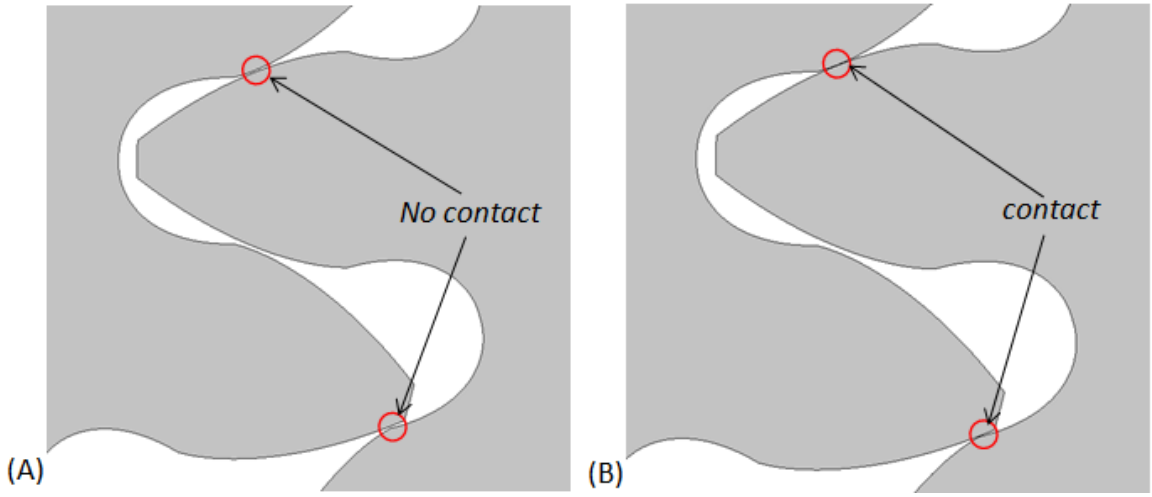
(A) Drive and slave gear without contact in the meshing zone; (B) Drive and slave gear with contact in the meshing zone.
